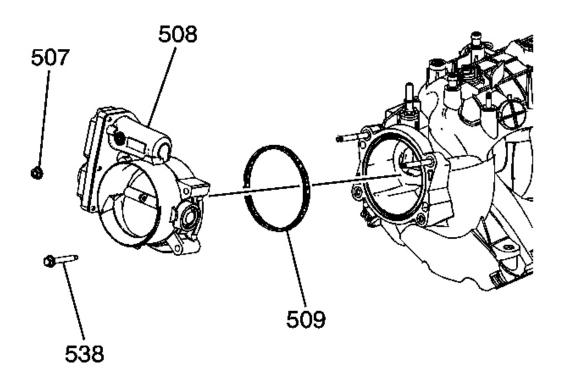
Throttle Body Assembly Courtesy of GENERAL MOTORS CORP.
